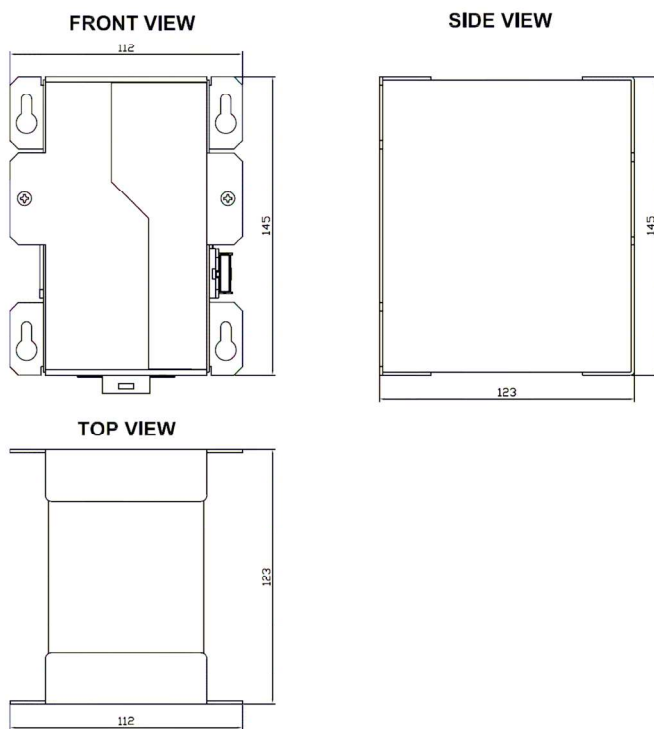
QUINT-BAT/24DC/3.4AH battery dimensional drawing
